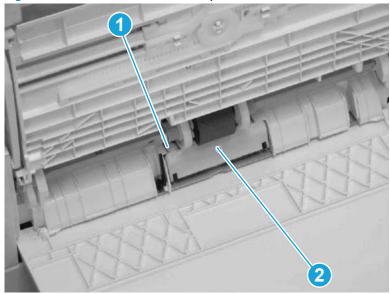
Release two hinge shafts and hold up the lifting plate
